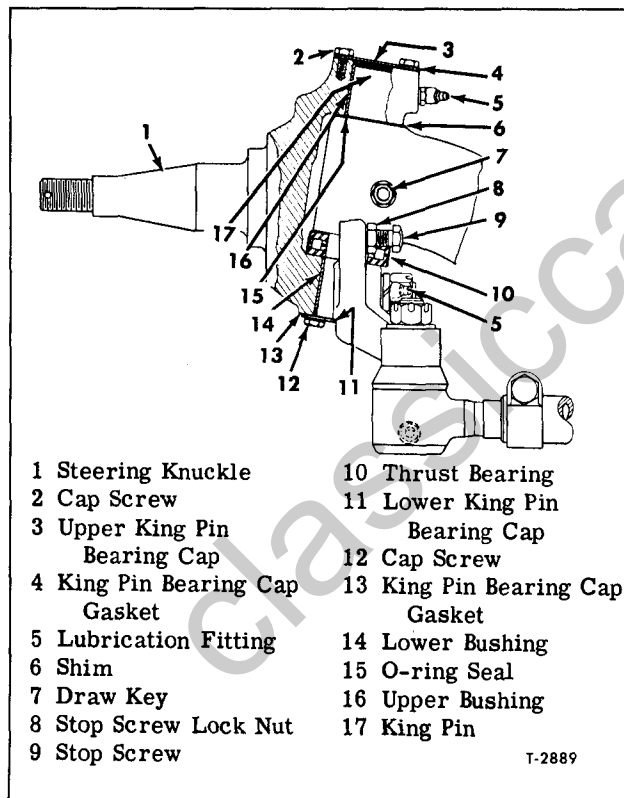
Steering Knuckle Construction (Corp. F070 Axle)
